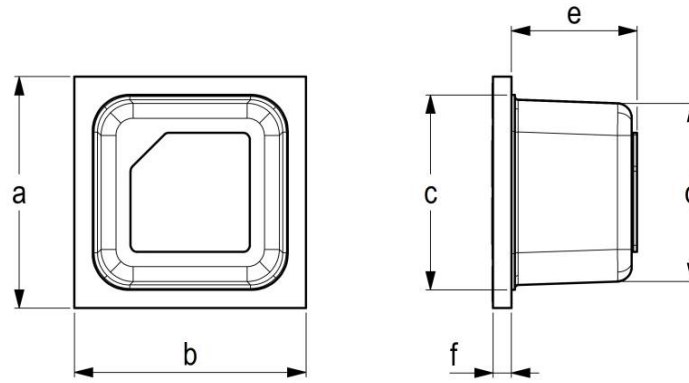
Packaging outline drawing of the SCD4x: (left) top view and (right) side view.
